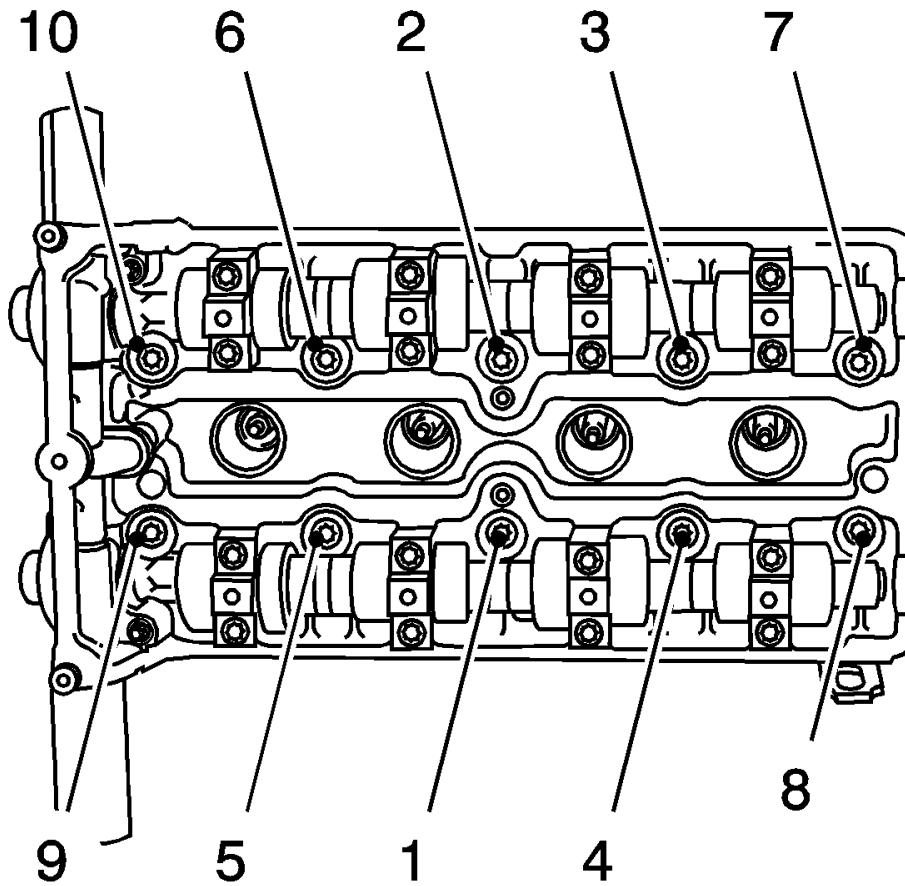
View Of Cylinder Head Bolt Tightening Sequence
